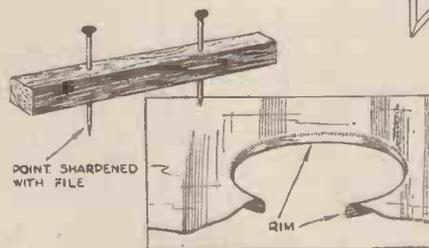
Simple tool for cutting the large hole in the tin casing
